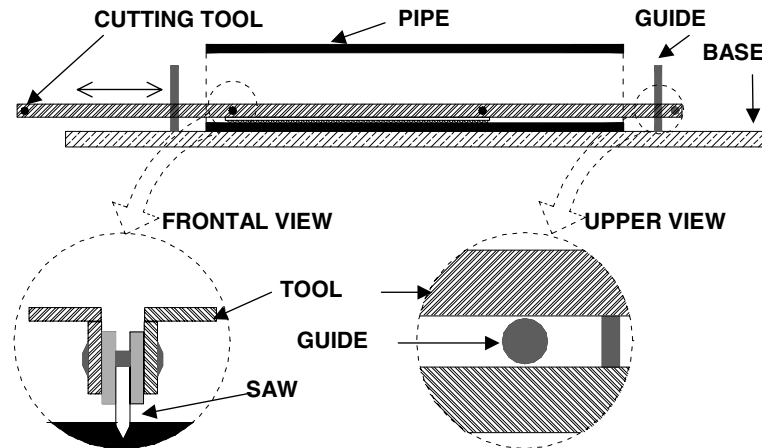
Sketch of the device for machining axial notches in P1 pipes.
